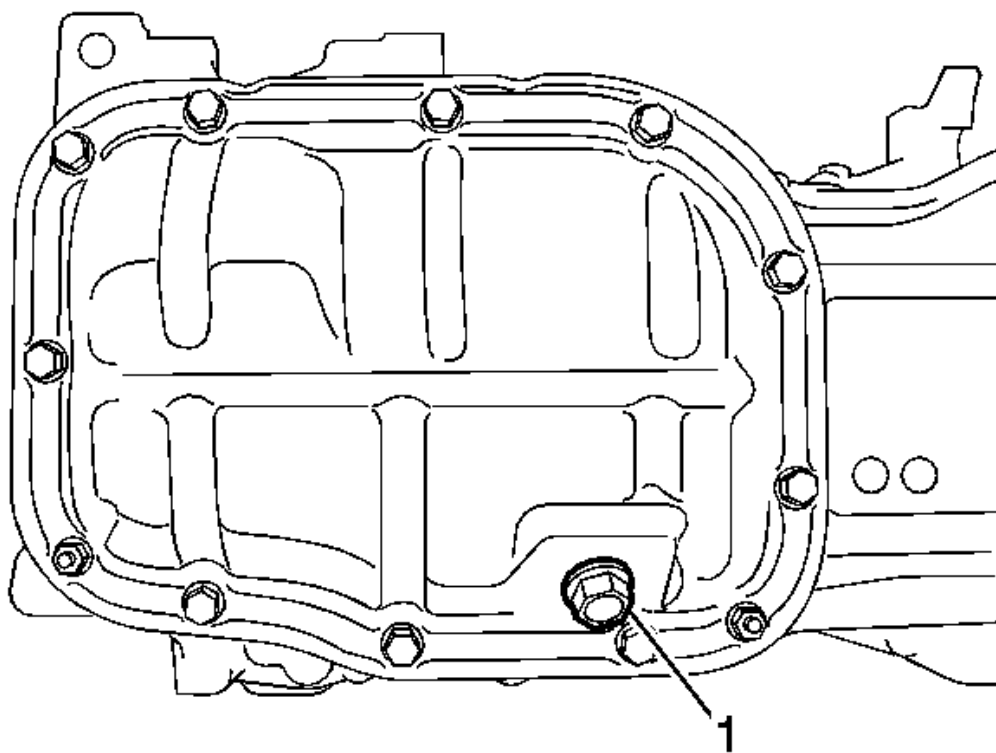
Identifying Oil Pan Drain Plug & Gasket
